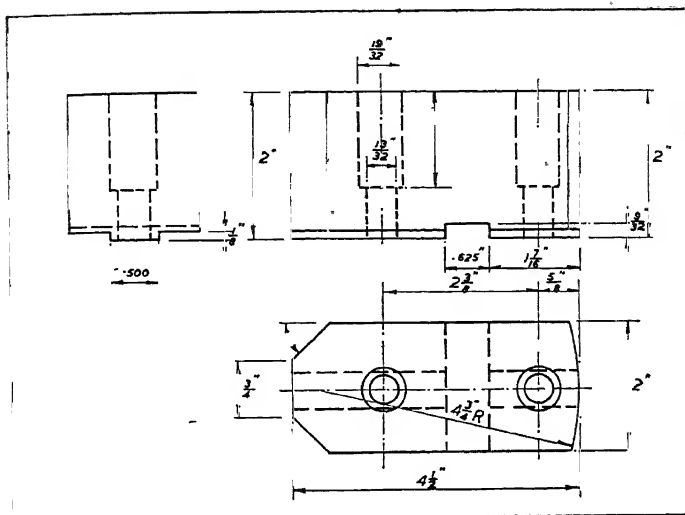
Soft jaws for Pratt 2-jaw chuck (with replaceable jaws). 9 in.
